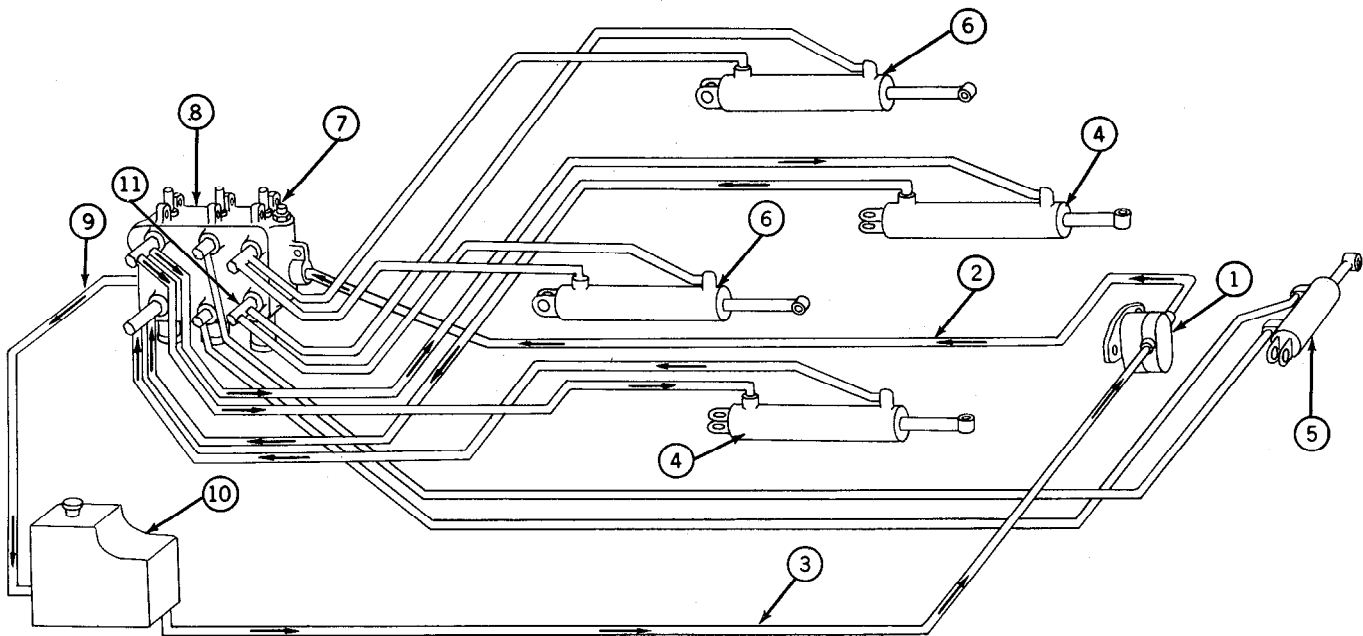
Crawler Loader with Backhoe or Rotoboom
